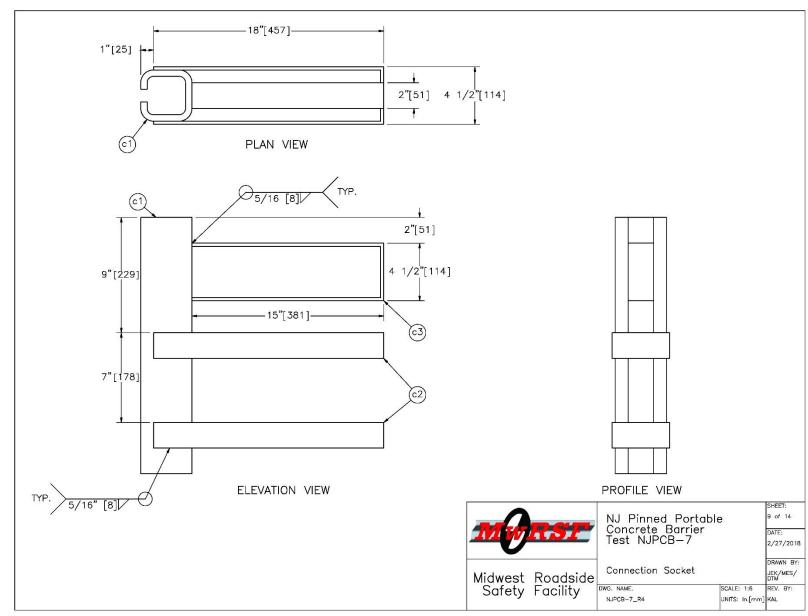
PCB Connection Socket Details, Test No. NJPCB-7
